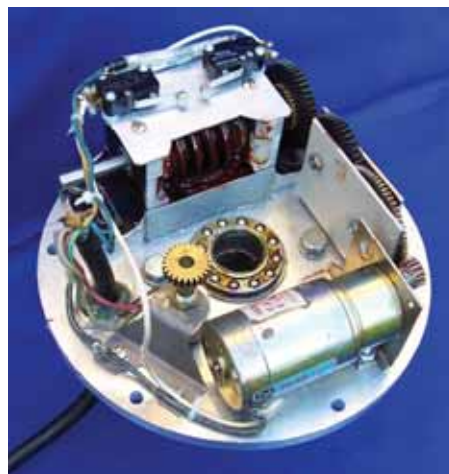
The base plate holds the motor, gear train and feedback pot.
